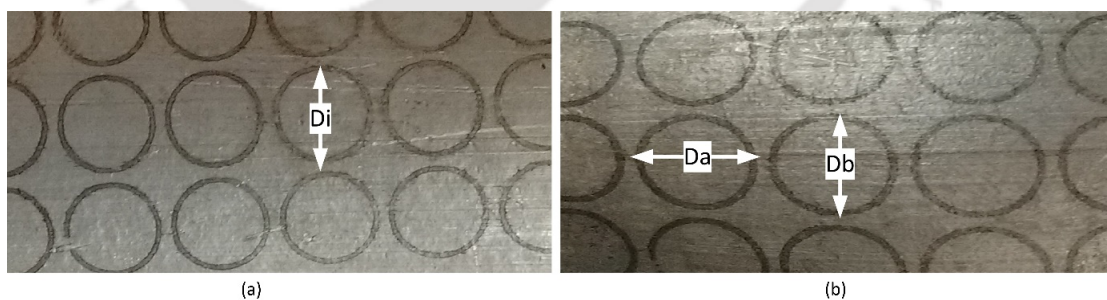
Circular marks on tube surface (a) before forming (b) after forming
